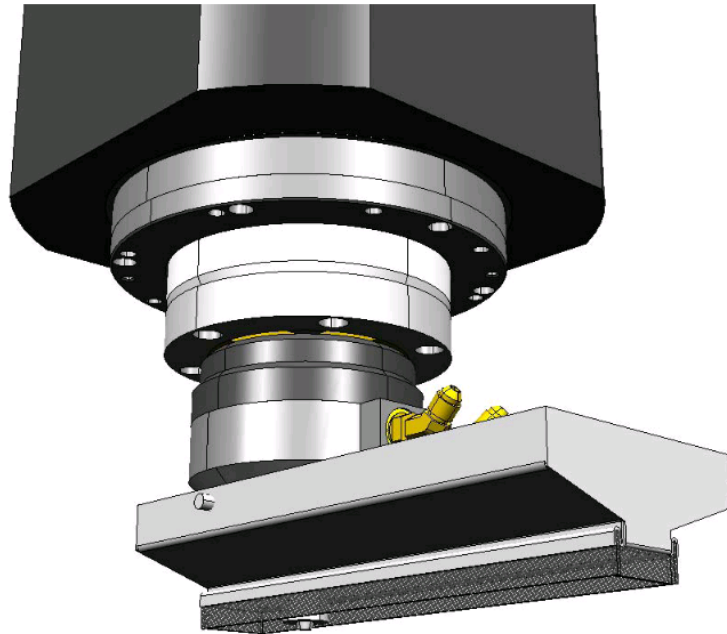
Schematic of the watercooled welding head and the argon chamber [92]
